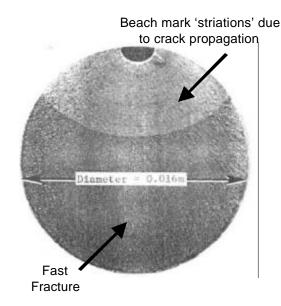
Beach marks (striations) on a fatigue fracture surface.
